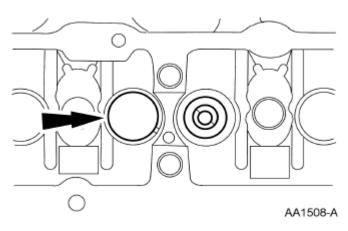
Locating Valve Tappets Courtesy of FORD MOTOR CO.
